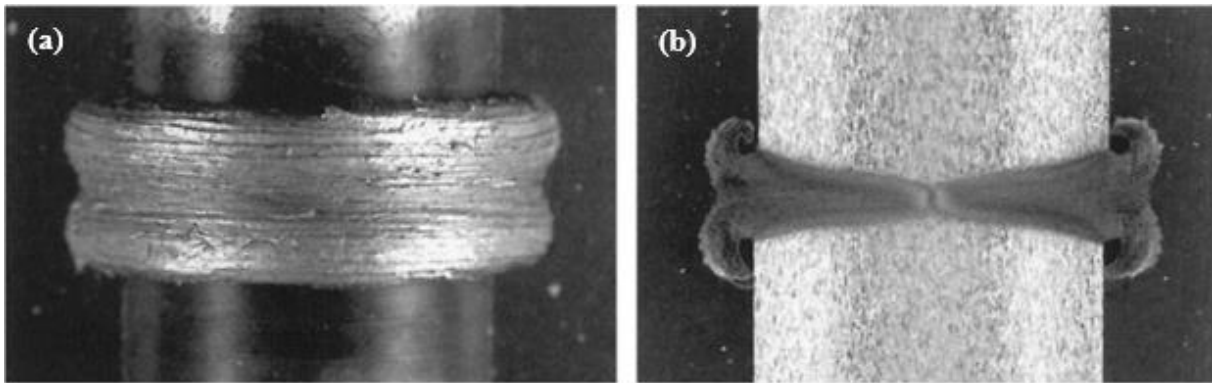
(a) Photo and (b) metallographic section of friction welded TZM. ^[36]
